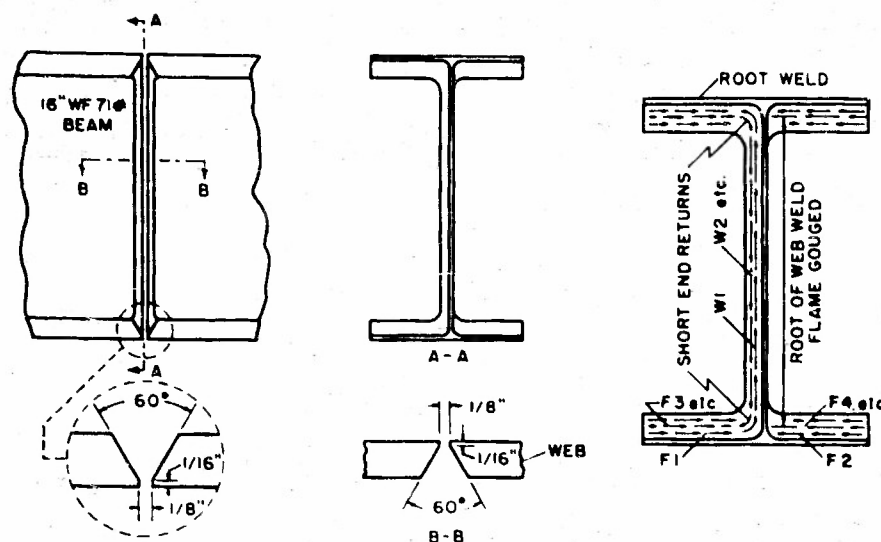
Edge preparation and sequence of welding for butt welds without web holes
